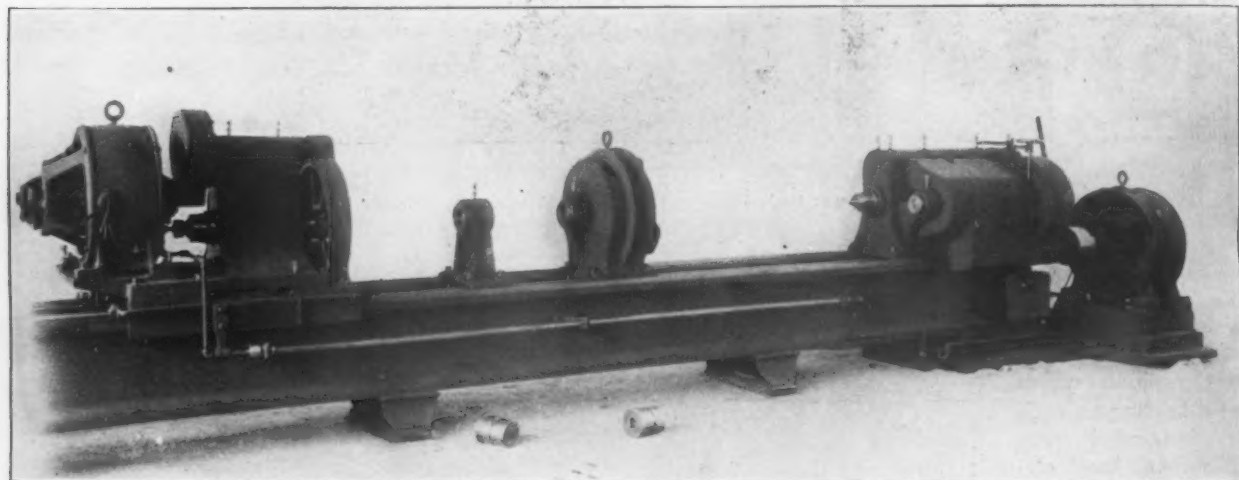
Rear View, Showing Lubricant Pump and Piping.
